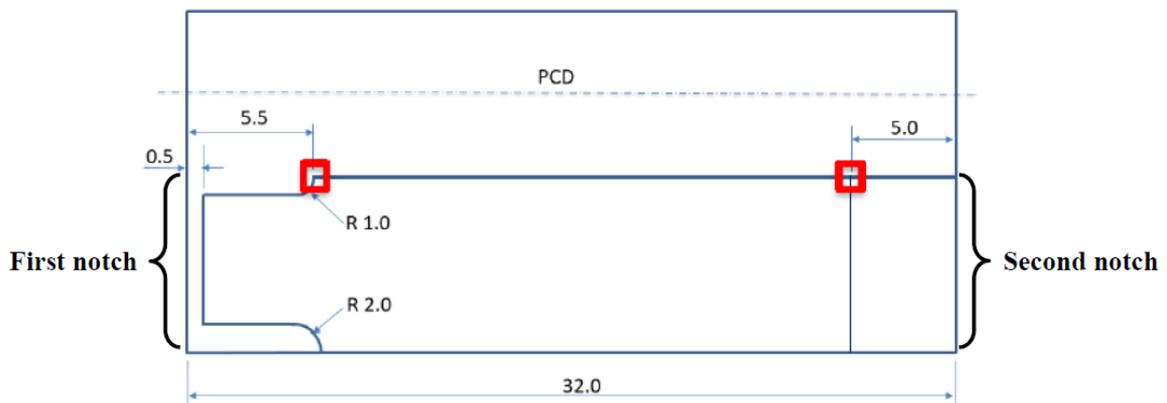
The notches in the planet gear (dimensions are in millimeters).
